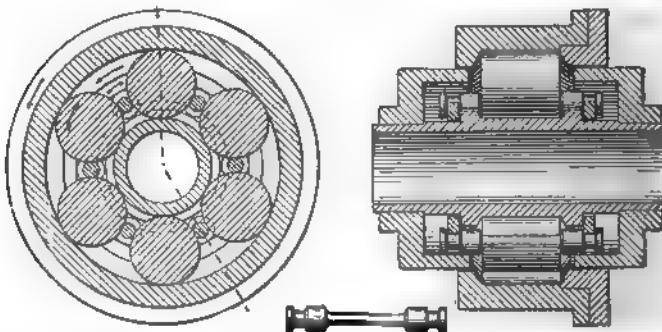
Sectional Diagrams of the "American" Roller Bearing. These bearings are beveled at the ends, as indicated, the bevels taking up the end thrusts, and are separated by smaller rollers, one of which is shown below the larger figures. These separating rollers do not come into contact with the rotating axle.
